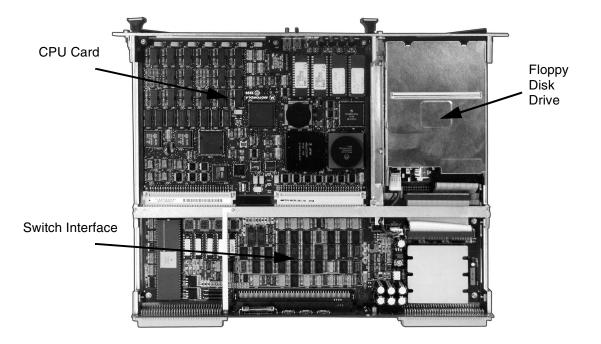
is a top view of the Combined Controller Assembly, showing its components.
